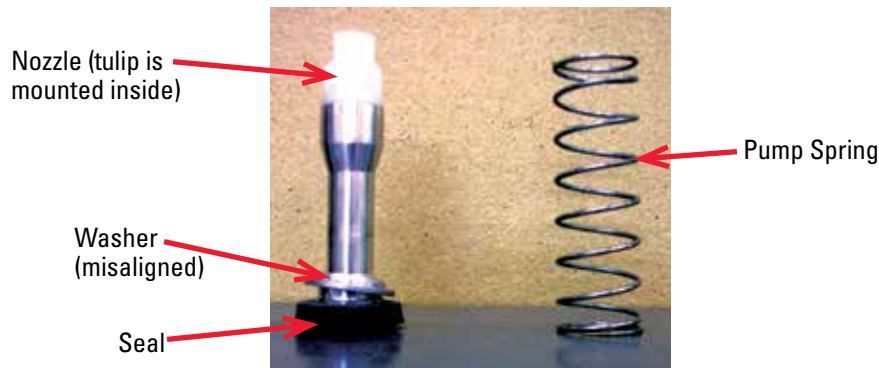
Puffer assembly and spring. Note that puffer washer is illustrated in a *misaligned* position. Install washer seated in place and flush to seal.
